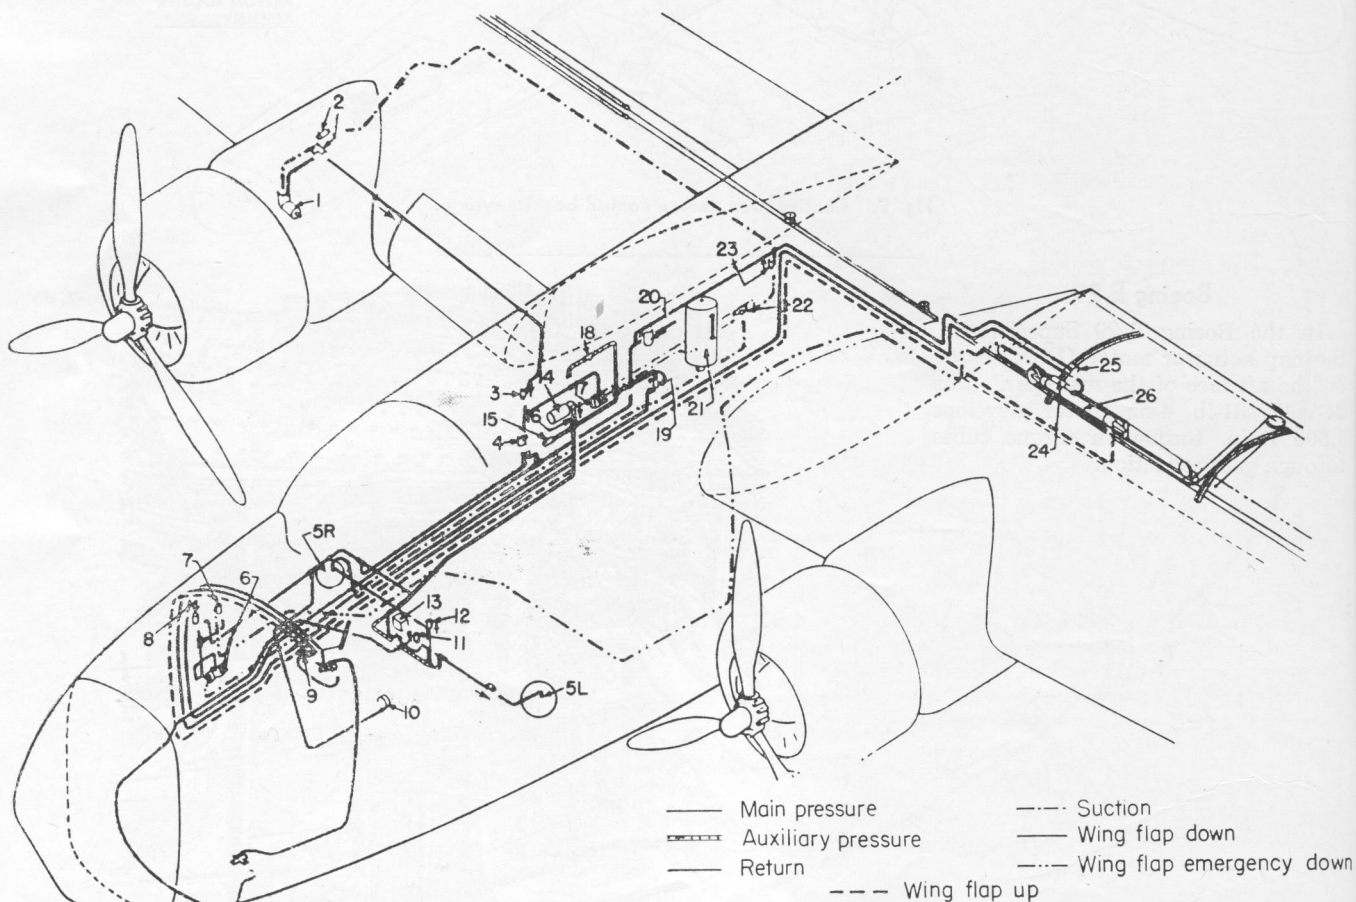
Wing flap hydraulic system: (1) engine-driven pump; (2) automatic seal coupling; (3) engine pump check valve; (4) relief valve; (5) accumulator; (6) hand pump; (7) emergency flap valve; (8) emergency pump valve; (9) flap selector valve; (10) pressure gauge; (11) check valve; (12) accumulator check valve; (13) unloading valve; (14) auxiliary electric pump; (15) auxiliary pump relief valve; (16) auxiliary pump check valve; (17) test stand valve; (18) emergency crossover valve; (19) pressure switch; (20) filter; (21) reservoir; (22) emergency reservoir valve; (23) suction line check valve; (24) shuttle valve; (25) flap relief valve; (26) flap cylinder.
